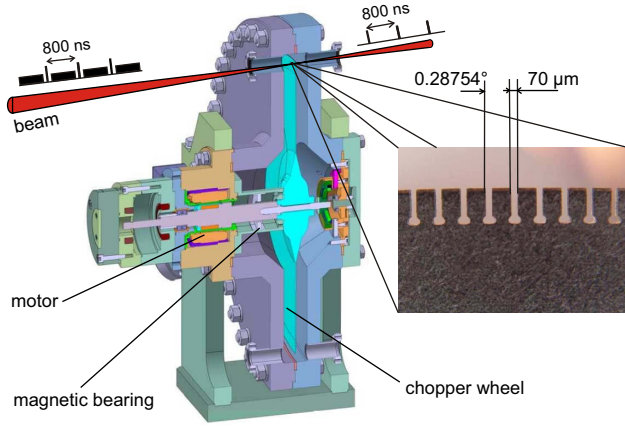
Optical layout and mechanical assembly drawing of the MHz light chopper system. A specially designed wheel (cyan) with radially decreasing thickness (minimum 0.5 mm) has 1252 slits (of 70 μm width) at its outer edge and rotates with 998 Hz. After passing a variable entrance slit (here 70 μm), the incident focused light beam (red) has to pass these chopper slits. The patterns close to the beam (red) depict a temporal pattern as emitted by the source and after the chopper, respectively, indicating that only a single x-ray pulse at 1.25 MHz (800 ns) may transmit through the slits.
